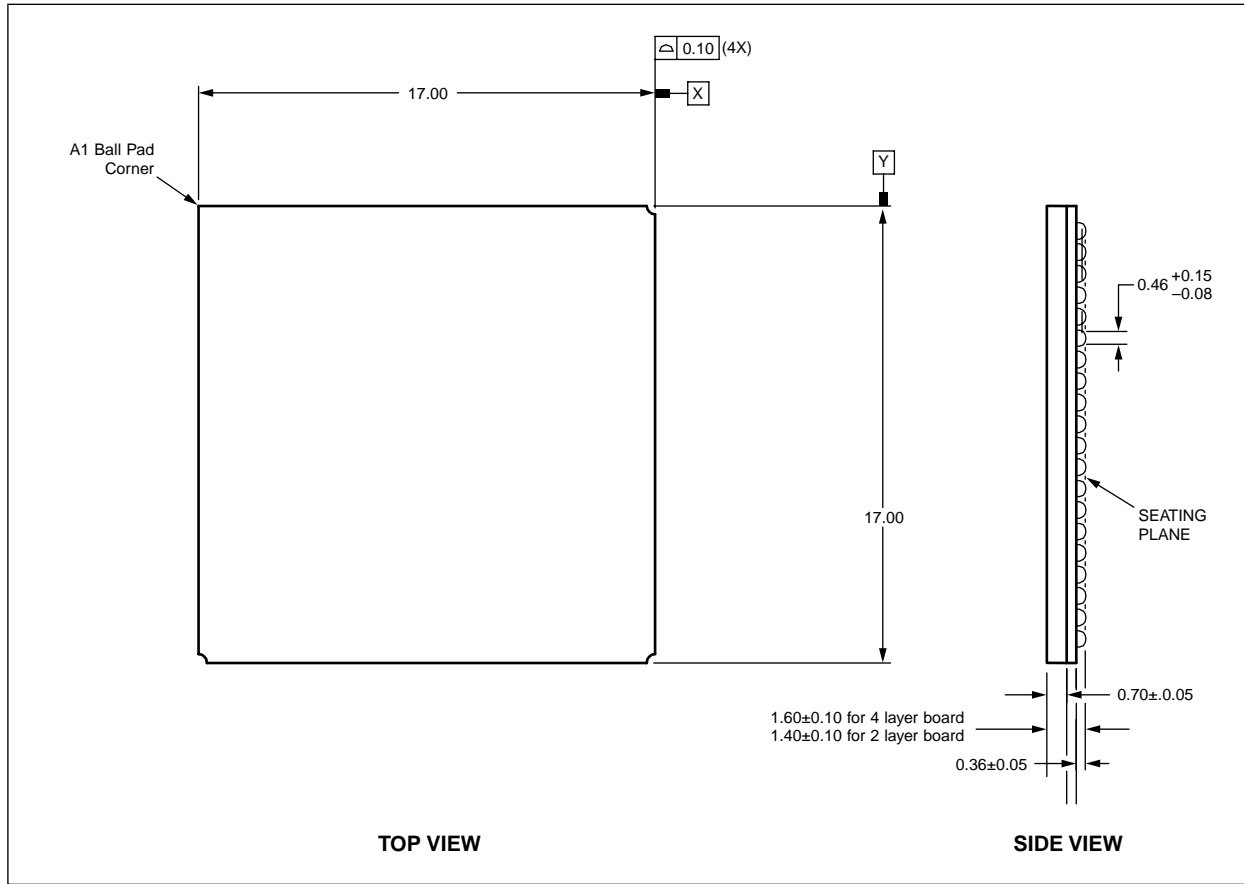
CX28224/5/9 Mechanical Drawing (Top and Side Views)
